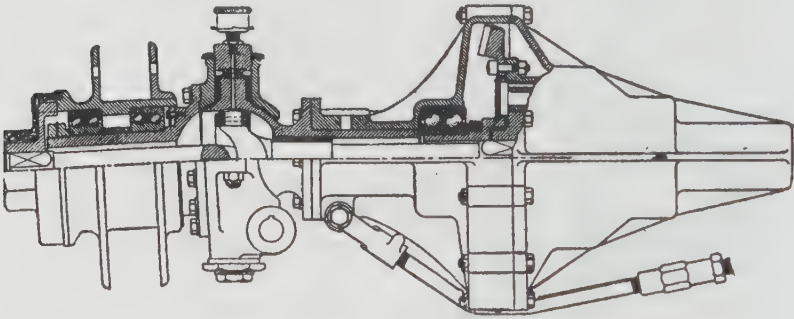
F. W. D. COMBINED STEERING AND DRIVING AXLE.
